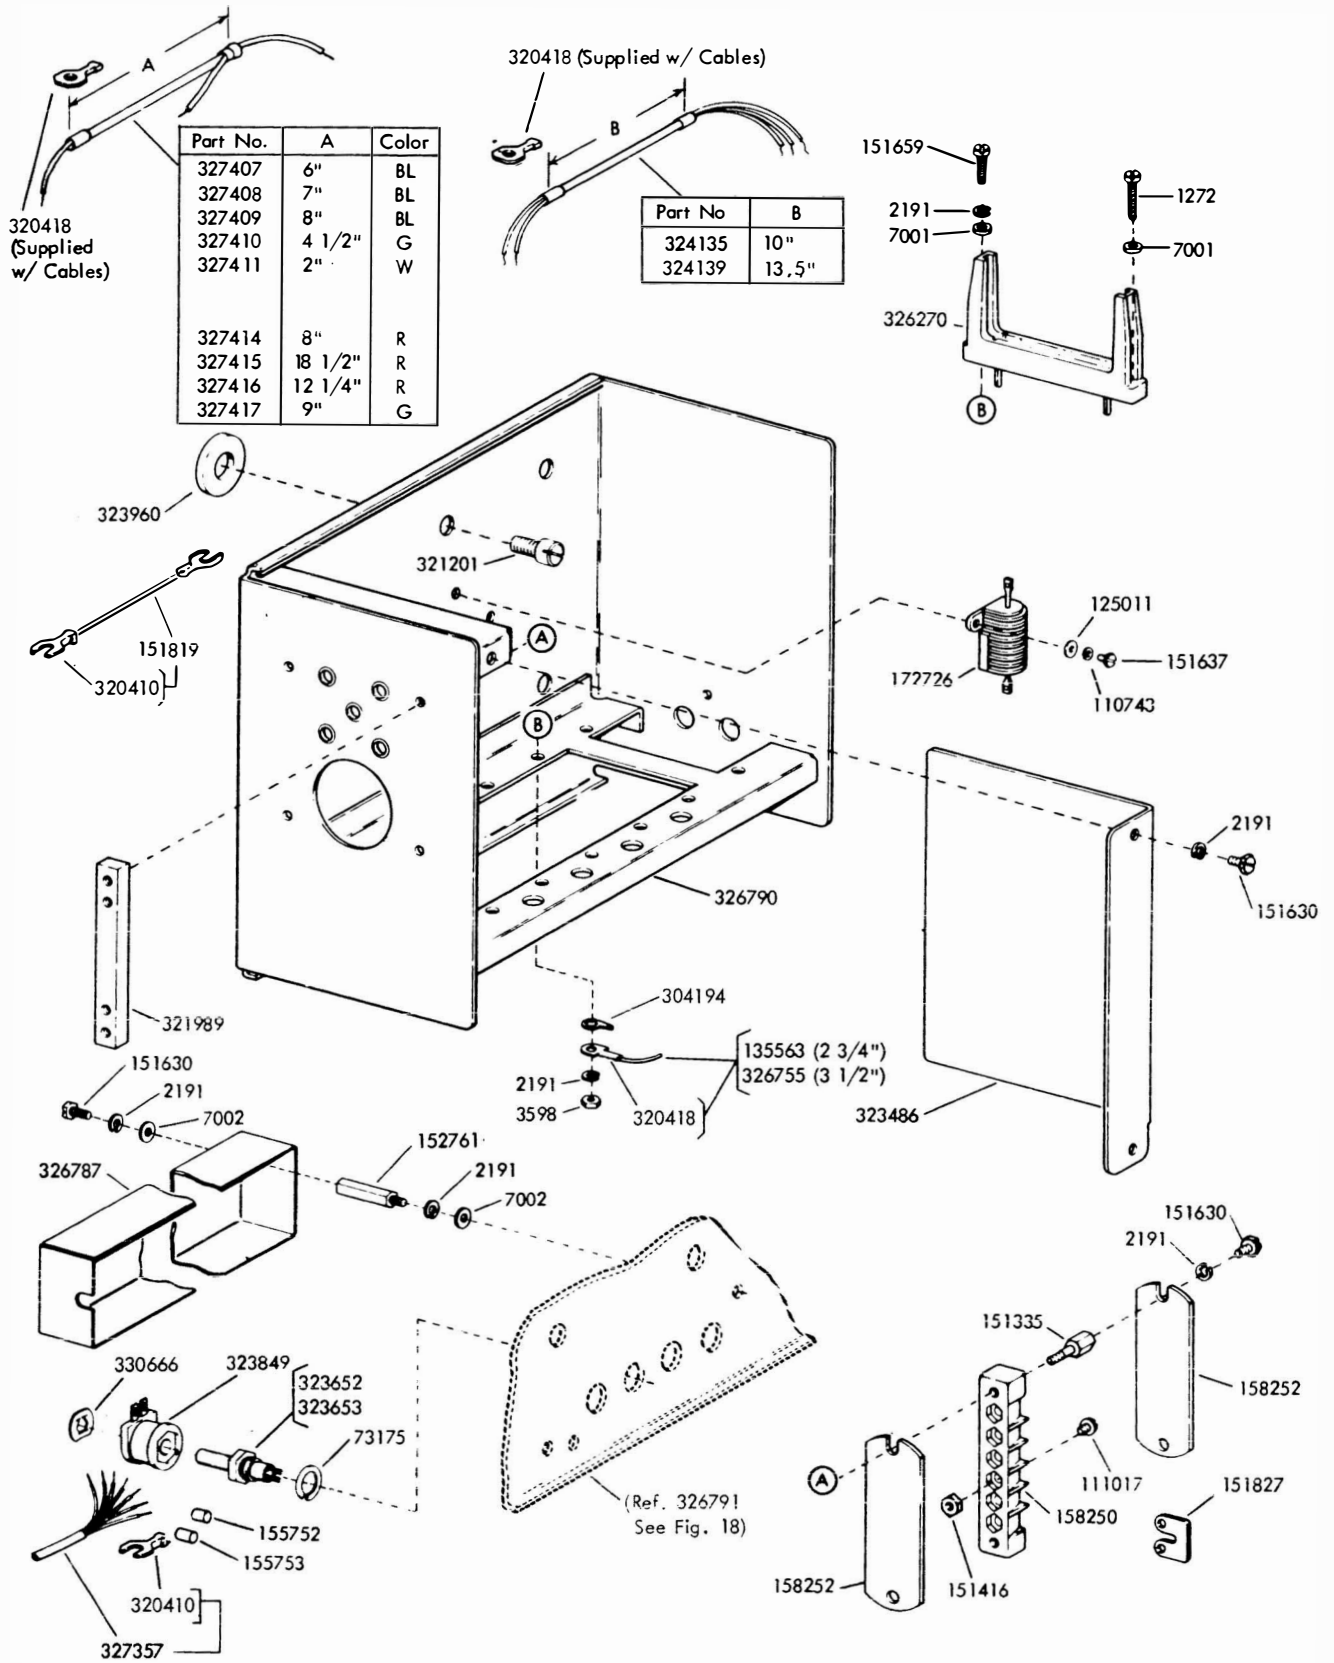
323821 ELECTRICAL SERVICE ASSEMBLY (Continued)
